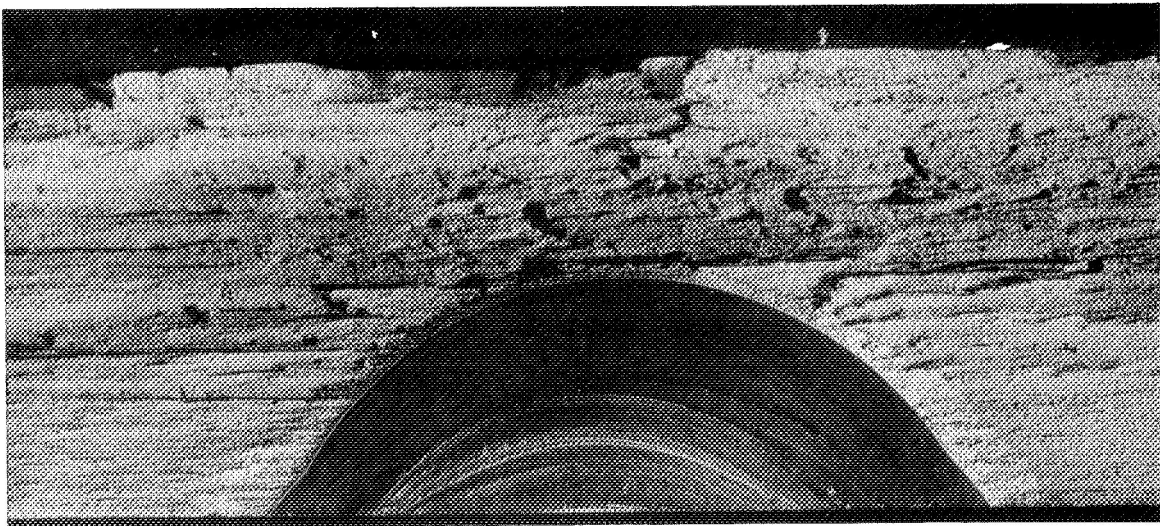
Fracture Face of an Al X7007-T6 Surface-Flawed Specimen,
